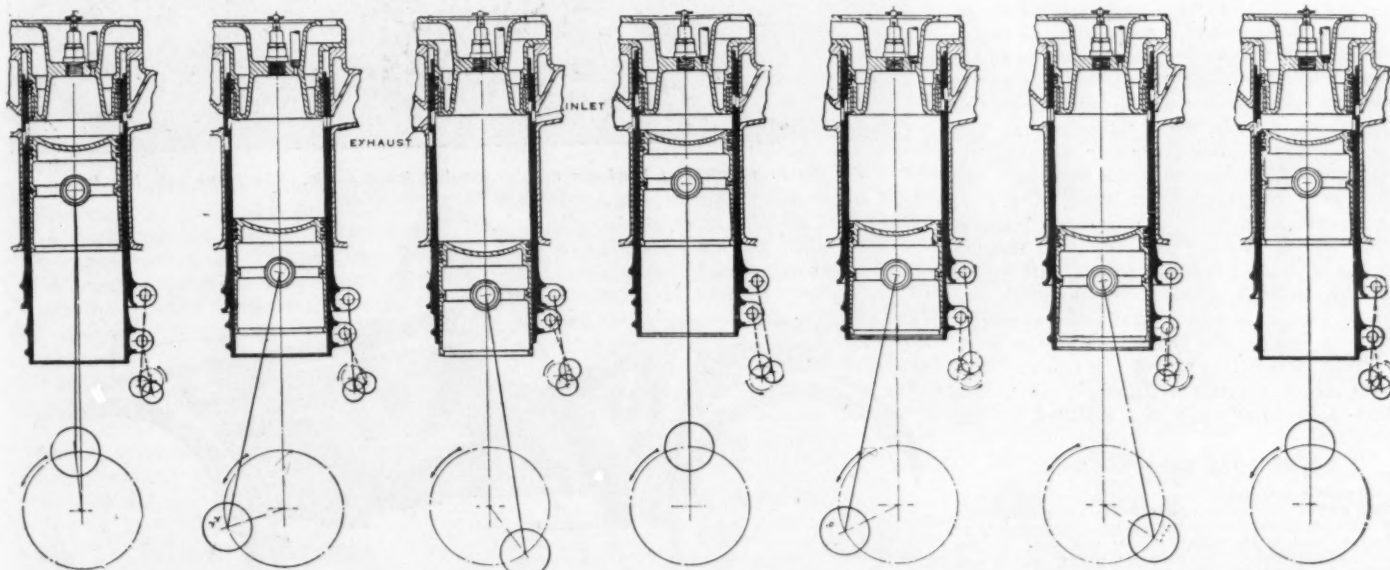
Cycle of operation of the Knight sleeve-valve engine. From the last position of piston and sleeves it will be seen that the exhaust valve closes on dead center
